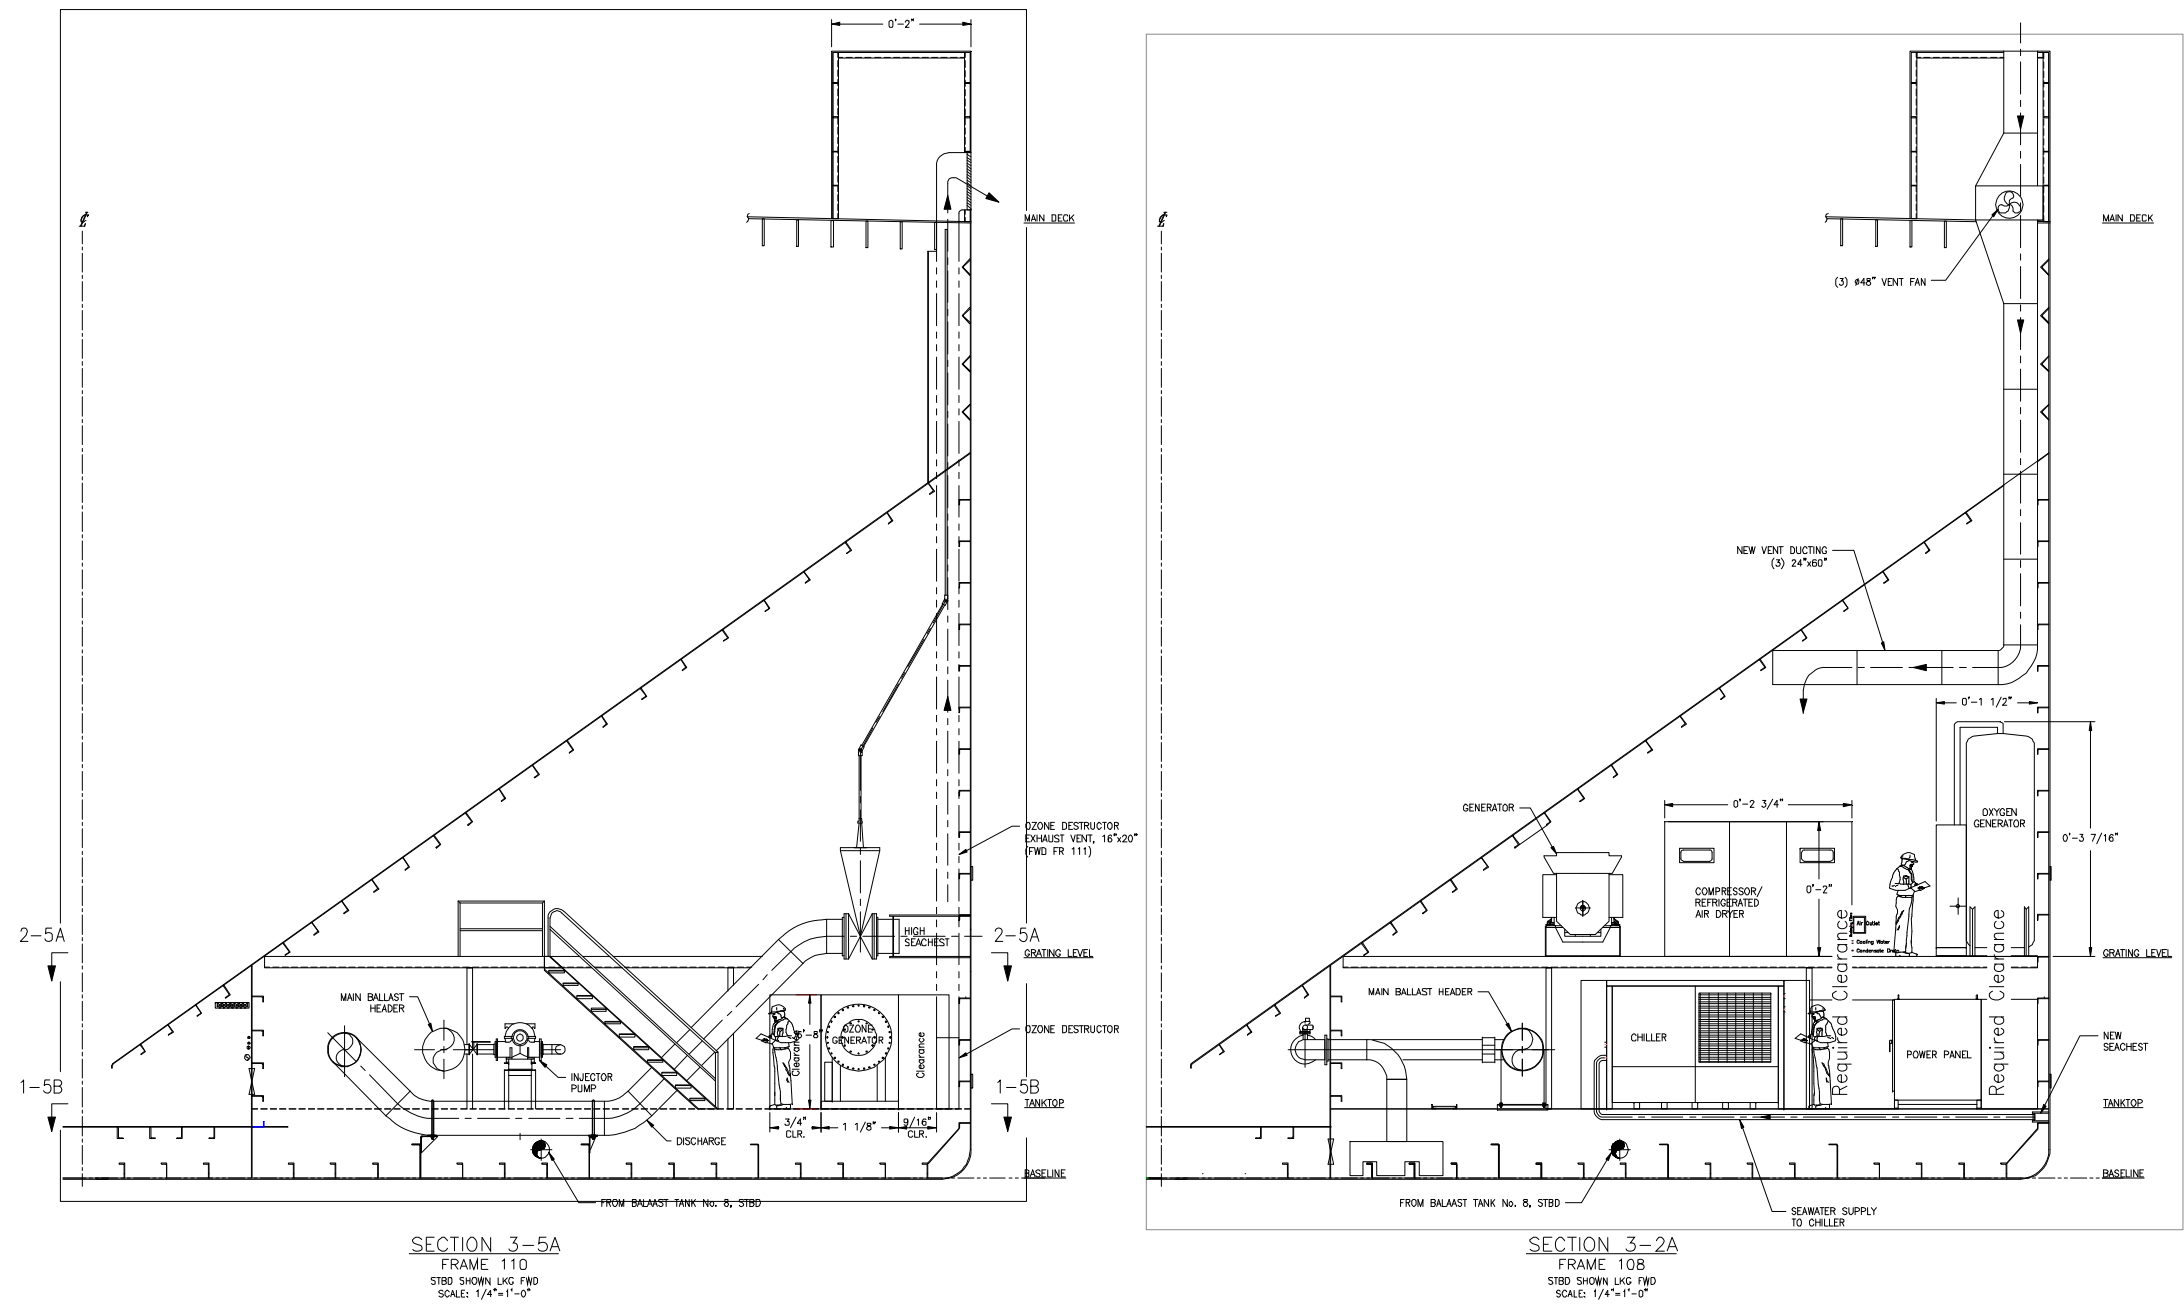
Vessel Two, BWT System 2 (ozone BWT System): general arrangement and piping installation (3 of 4).
